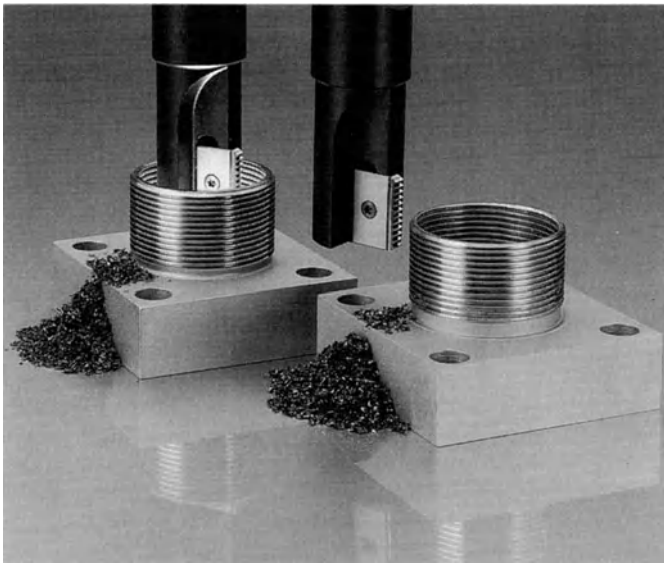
External and internal thread milling. [Courtesy of Seco.]
